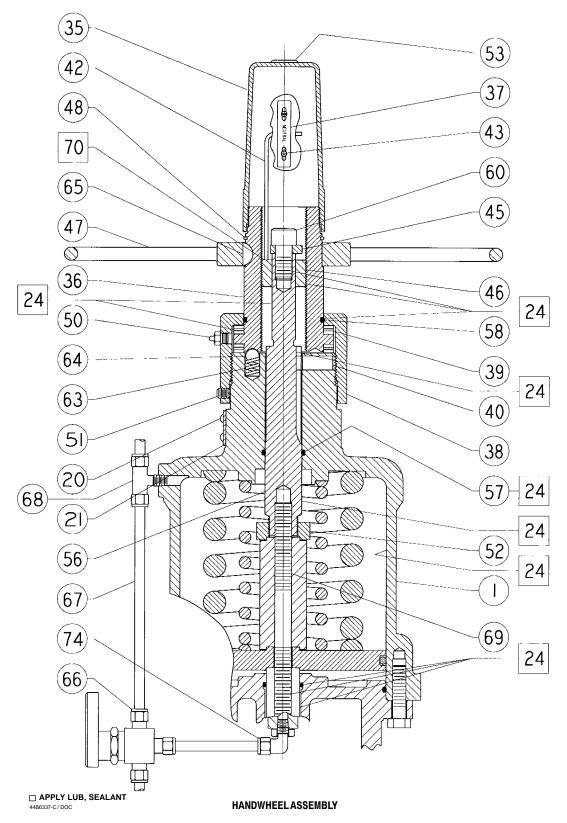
Fisher 585C Size 25 and 50 Actuators Handwheel Assembly (spring extends actuator rod)
